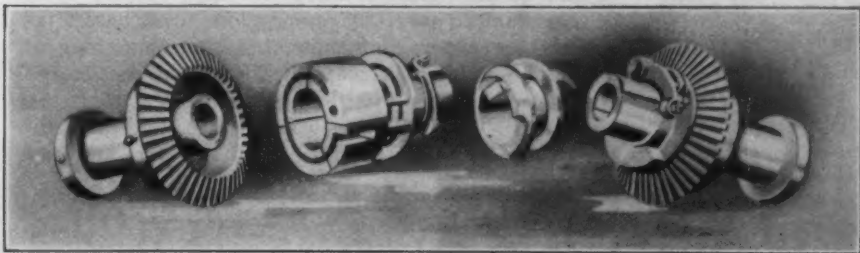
The Reversing Gears and Clutches of the Tapping Mechanism.
